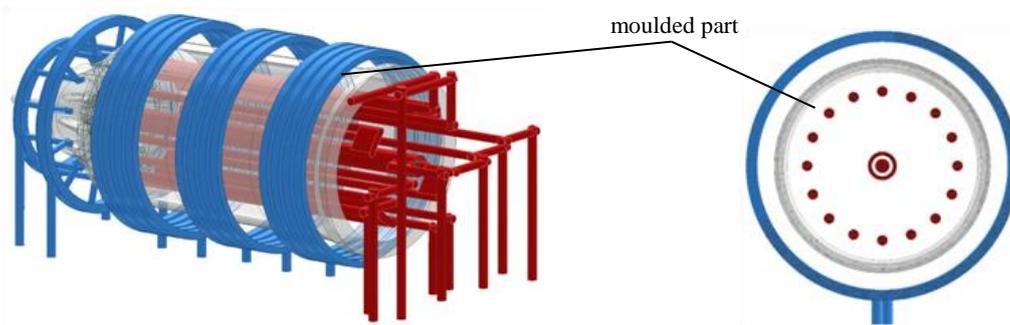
3D model of mould cooling: blue – cooling of the die; red – cooling of the punch
